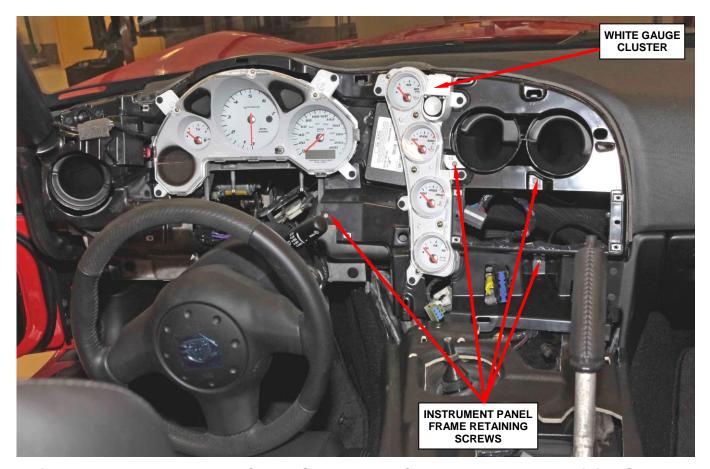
Instrument Panel Center Stack Gauge Cluster and Frame Retaining Screws
